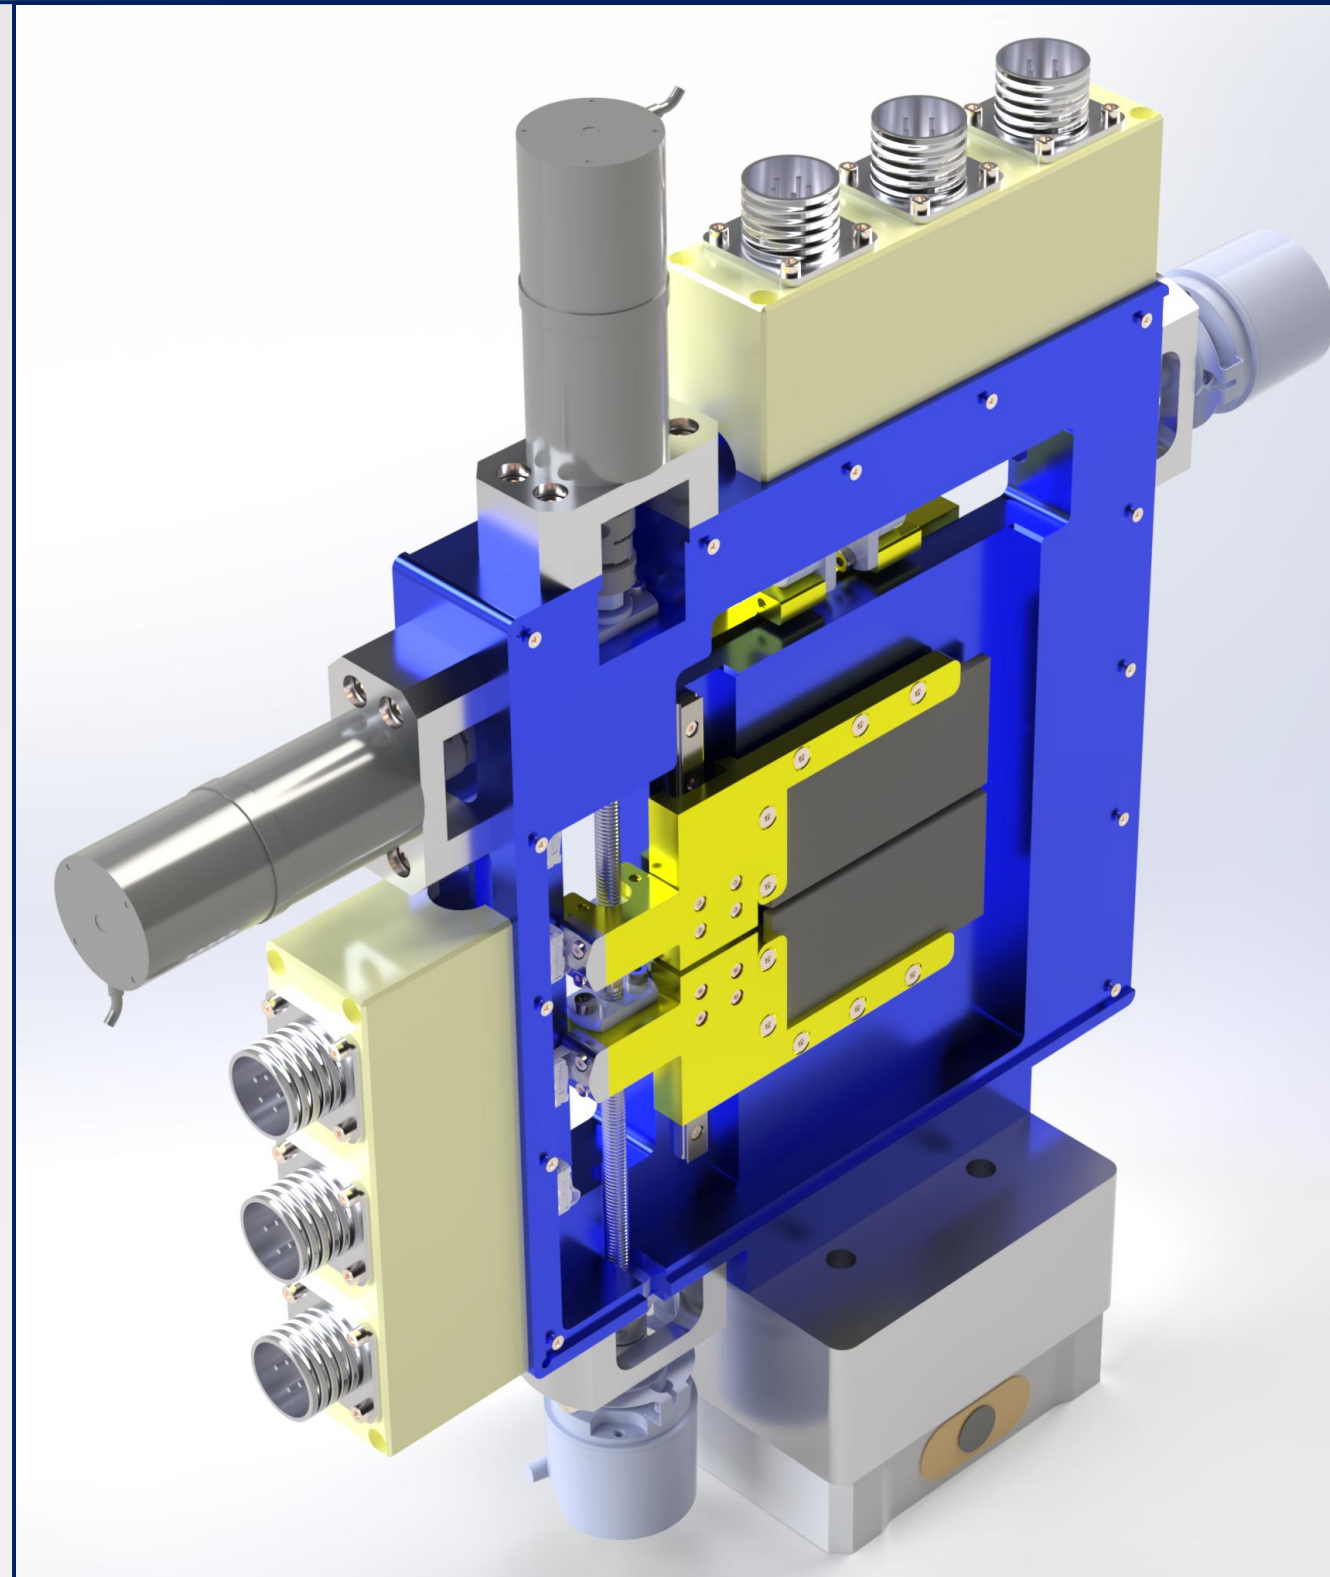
Design For Manufacture and Assembly - Prototype CAD Model Rendered
